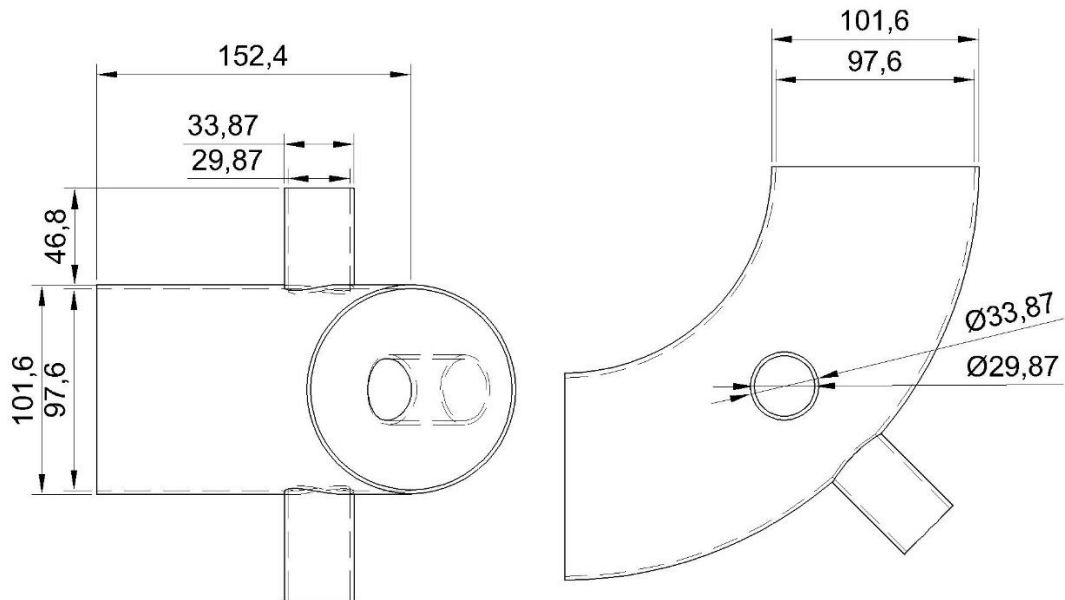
Detailed dimensions of the 90° long radius elbow ( $R = 1.5D$ ). Left: front view Right: top view. Flanges on the elbow are not shown.
